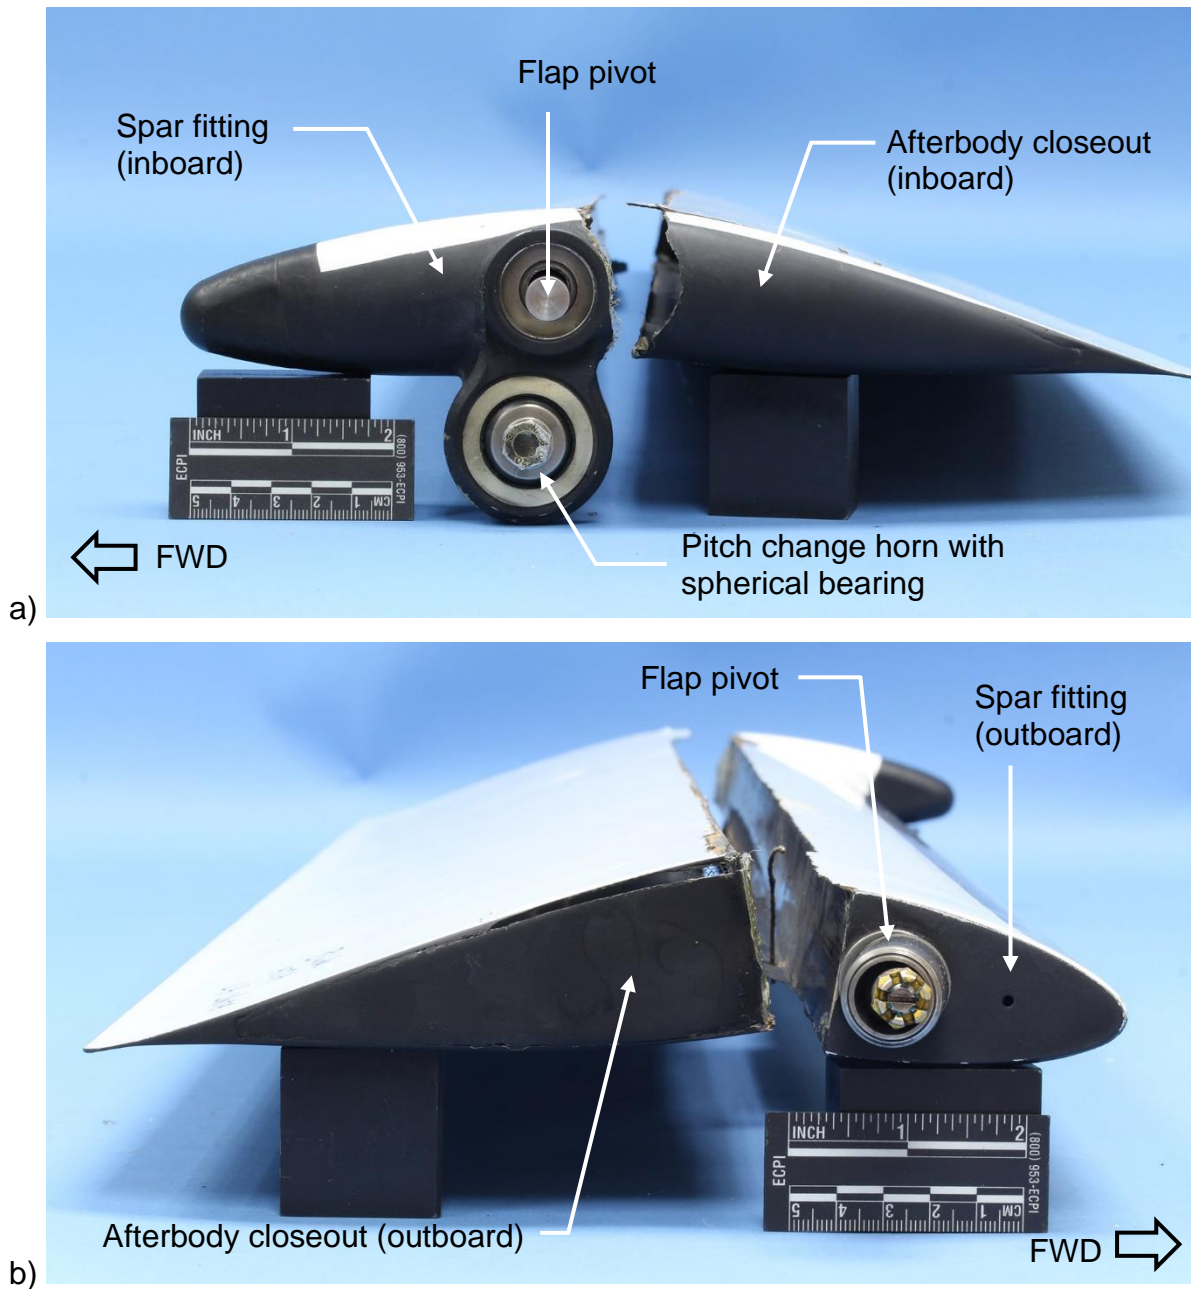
End views of the separated servo flap: a) inboard end viewed looking outboard and b) outboard end viewed looking inboard.
